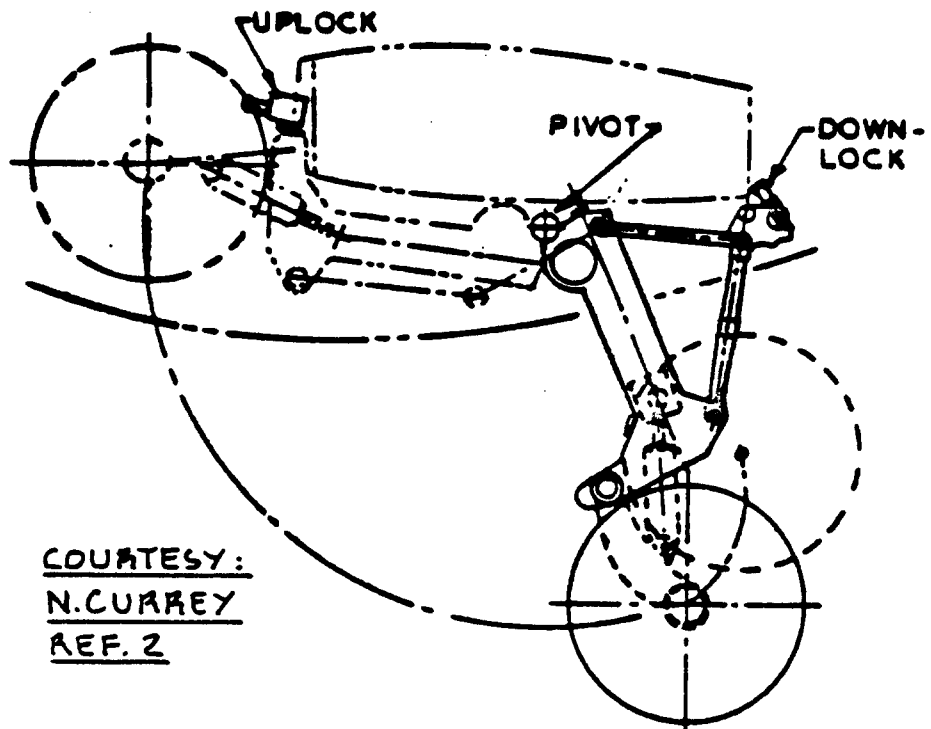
Forward Retracting Gear Clearing Wing Box
